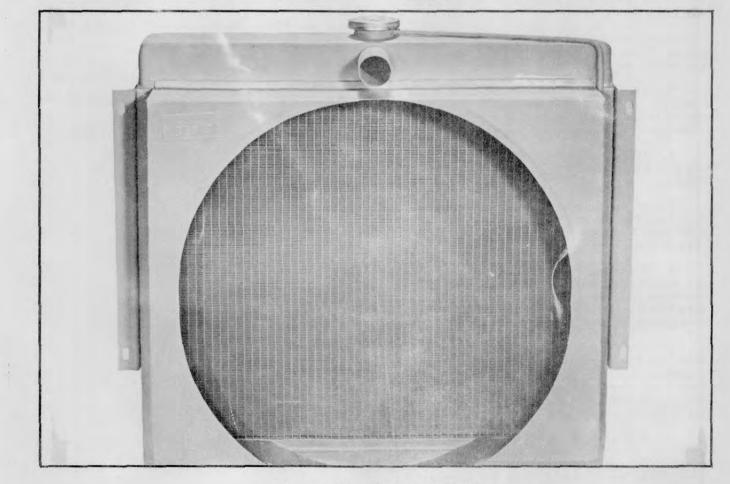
Typical Radiator 1000H 1203-1 CLARK EQUIPMENT INDUSTRIAL TRUCK DIVISION
